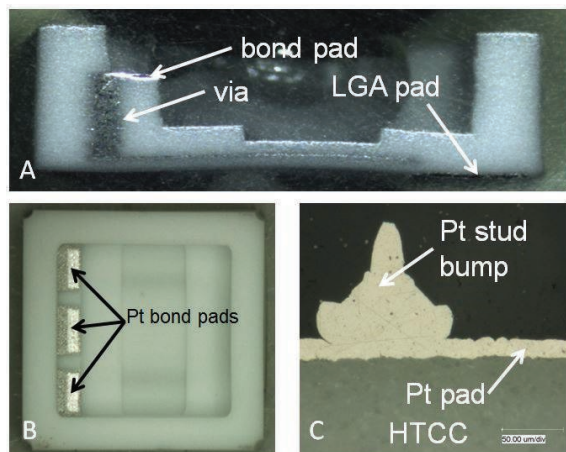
Light microscopy images: cross section of the “eHTP” cavity package showing a bond pad on a pedestal and a back side LGA pad (A), the top view of the package (B) and a cross section of a Pt stud bump TS-bonded to a Pt pad (C).
